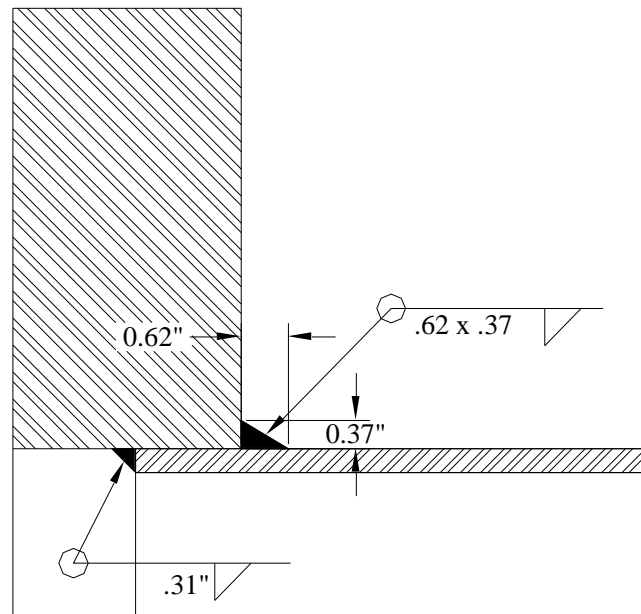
Socket Connection Weld Detail (Rios, 2007)
